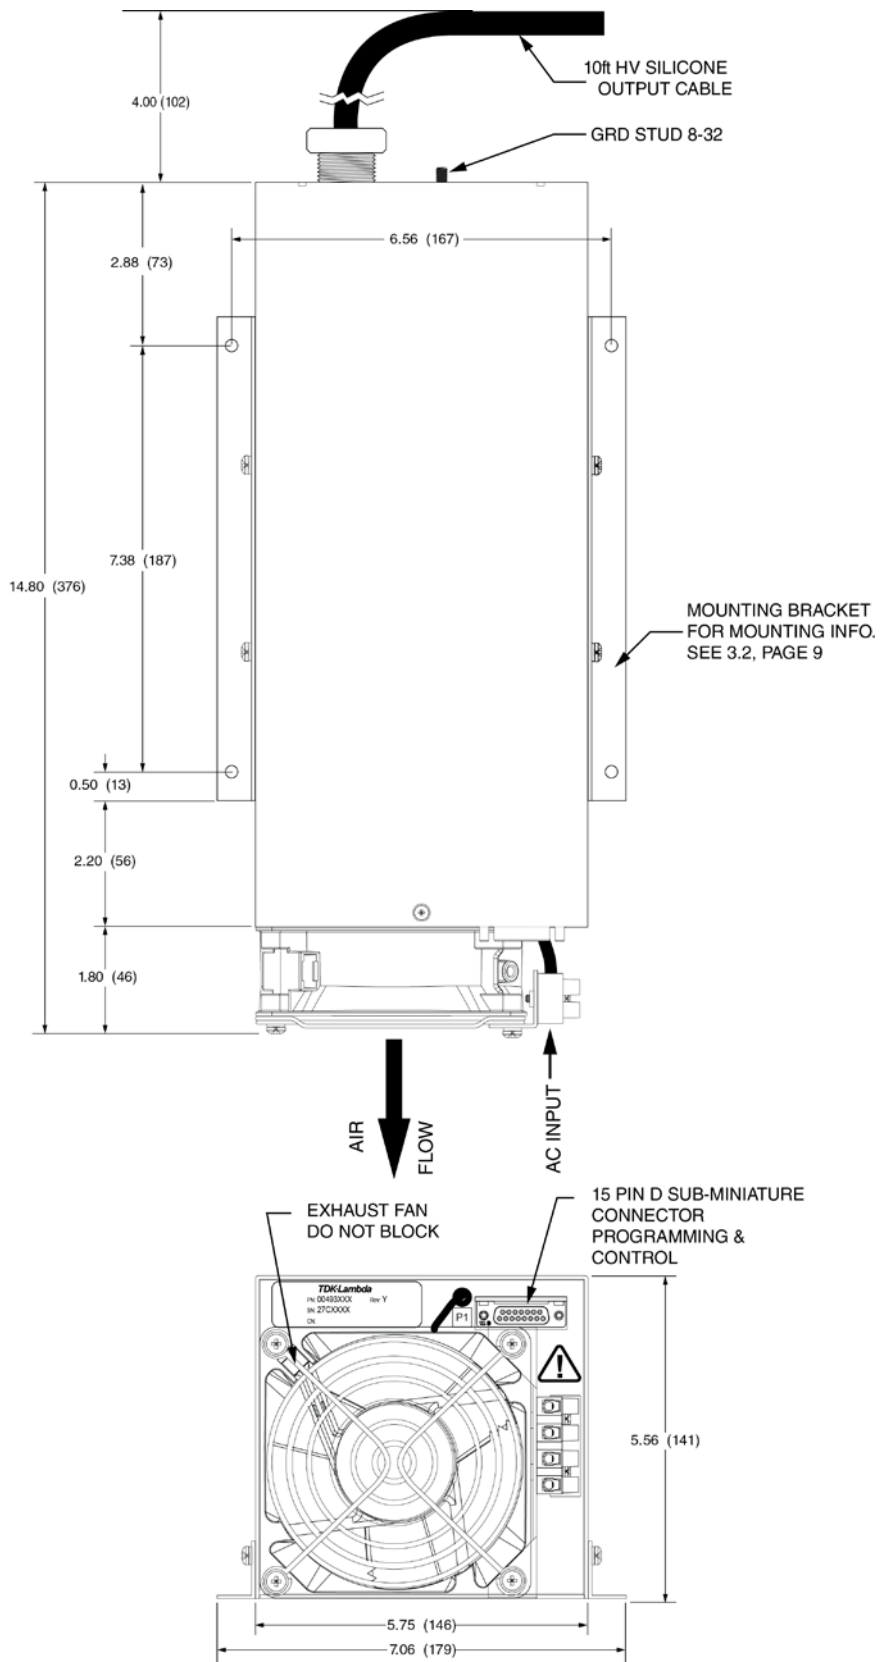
Mechanical Dimensions for 500A, 102A, 152A Outputs up to 6kV
